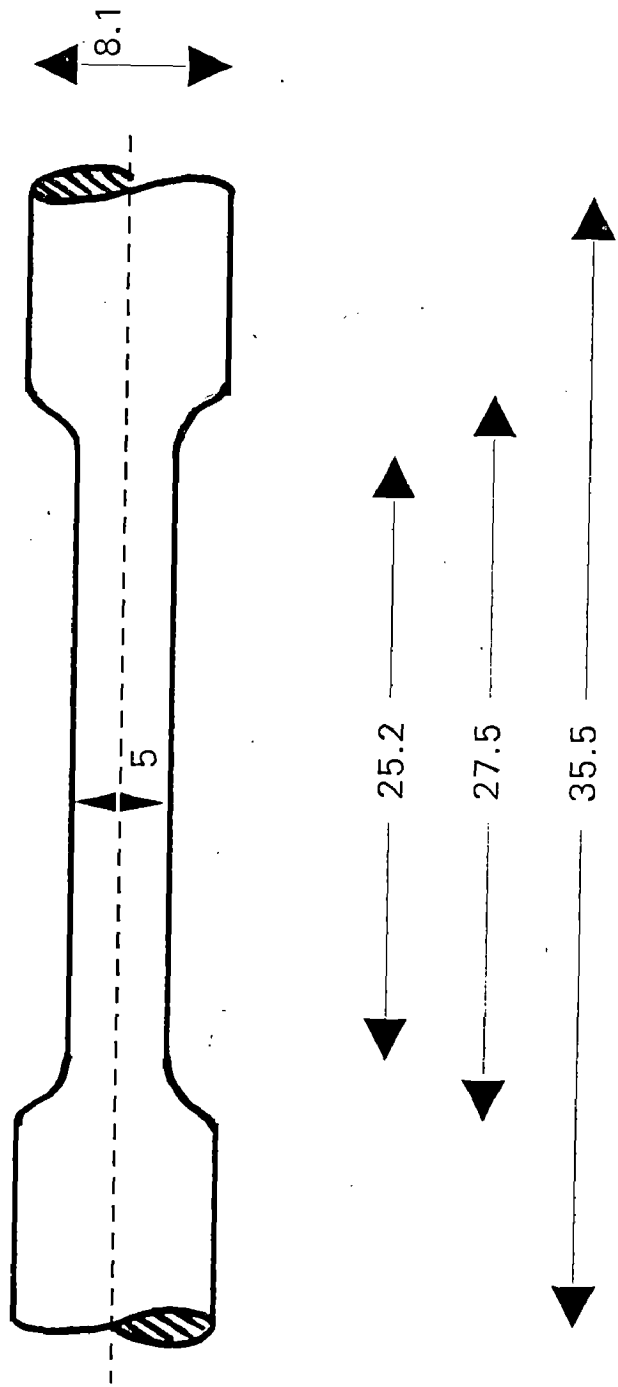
STANDARD TENSILE PIECE SPECIMEN
